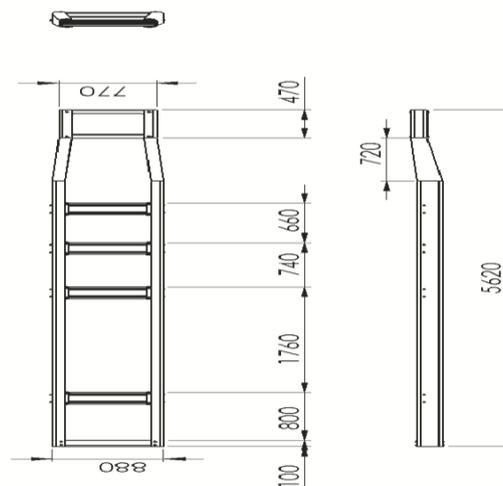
Part drawing of assembly in AUTO CAD 2012
